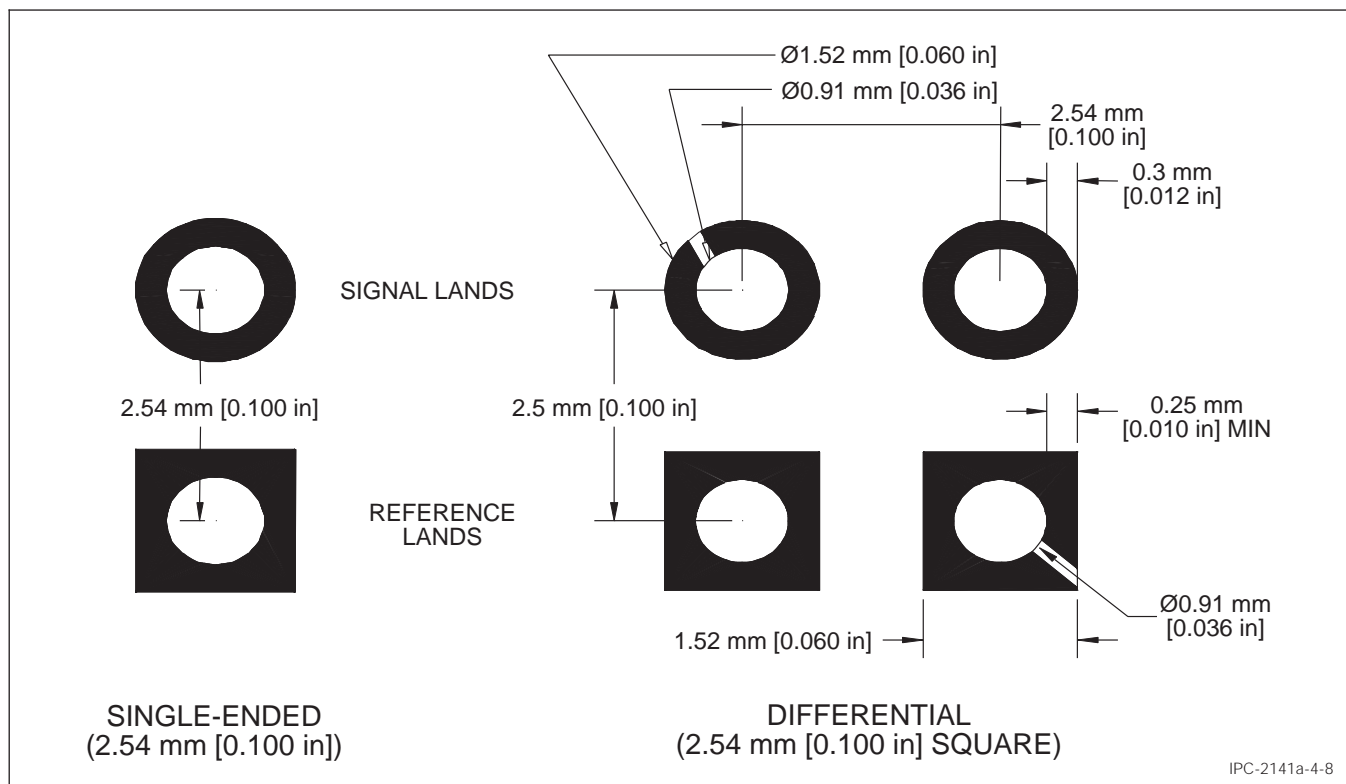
Impedance test interconnect contact pad geometry and drilled hole size. All dimensions are reference.
